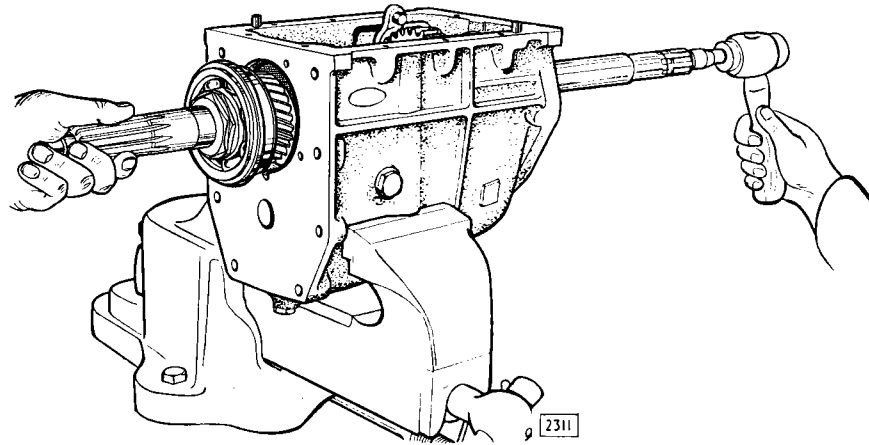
The constant pinion shaft is removed by tapping the mainshaft forward
